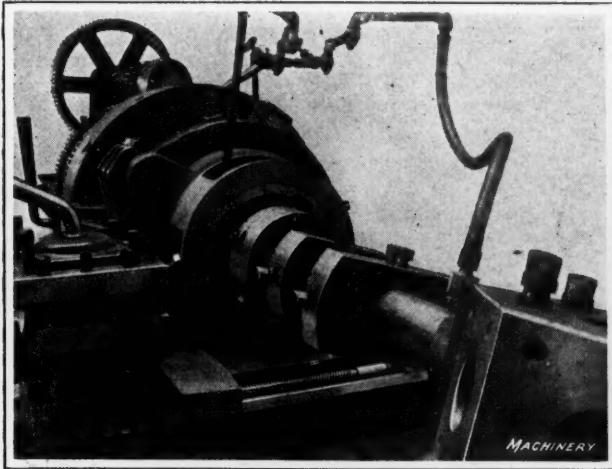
Special Fixture of the Bonnet Type for holding Heavy Work shown in Fig. 29
